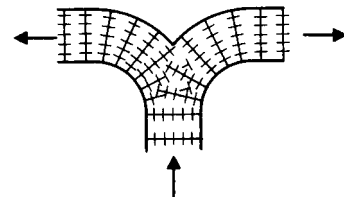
Wheel switch. Fixed wheels carry material on incoming conveyor to outgoing conveyor until movable set of wheels is raised above the fixed set. Then material is carried in the other direction.
